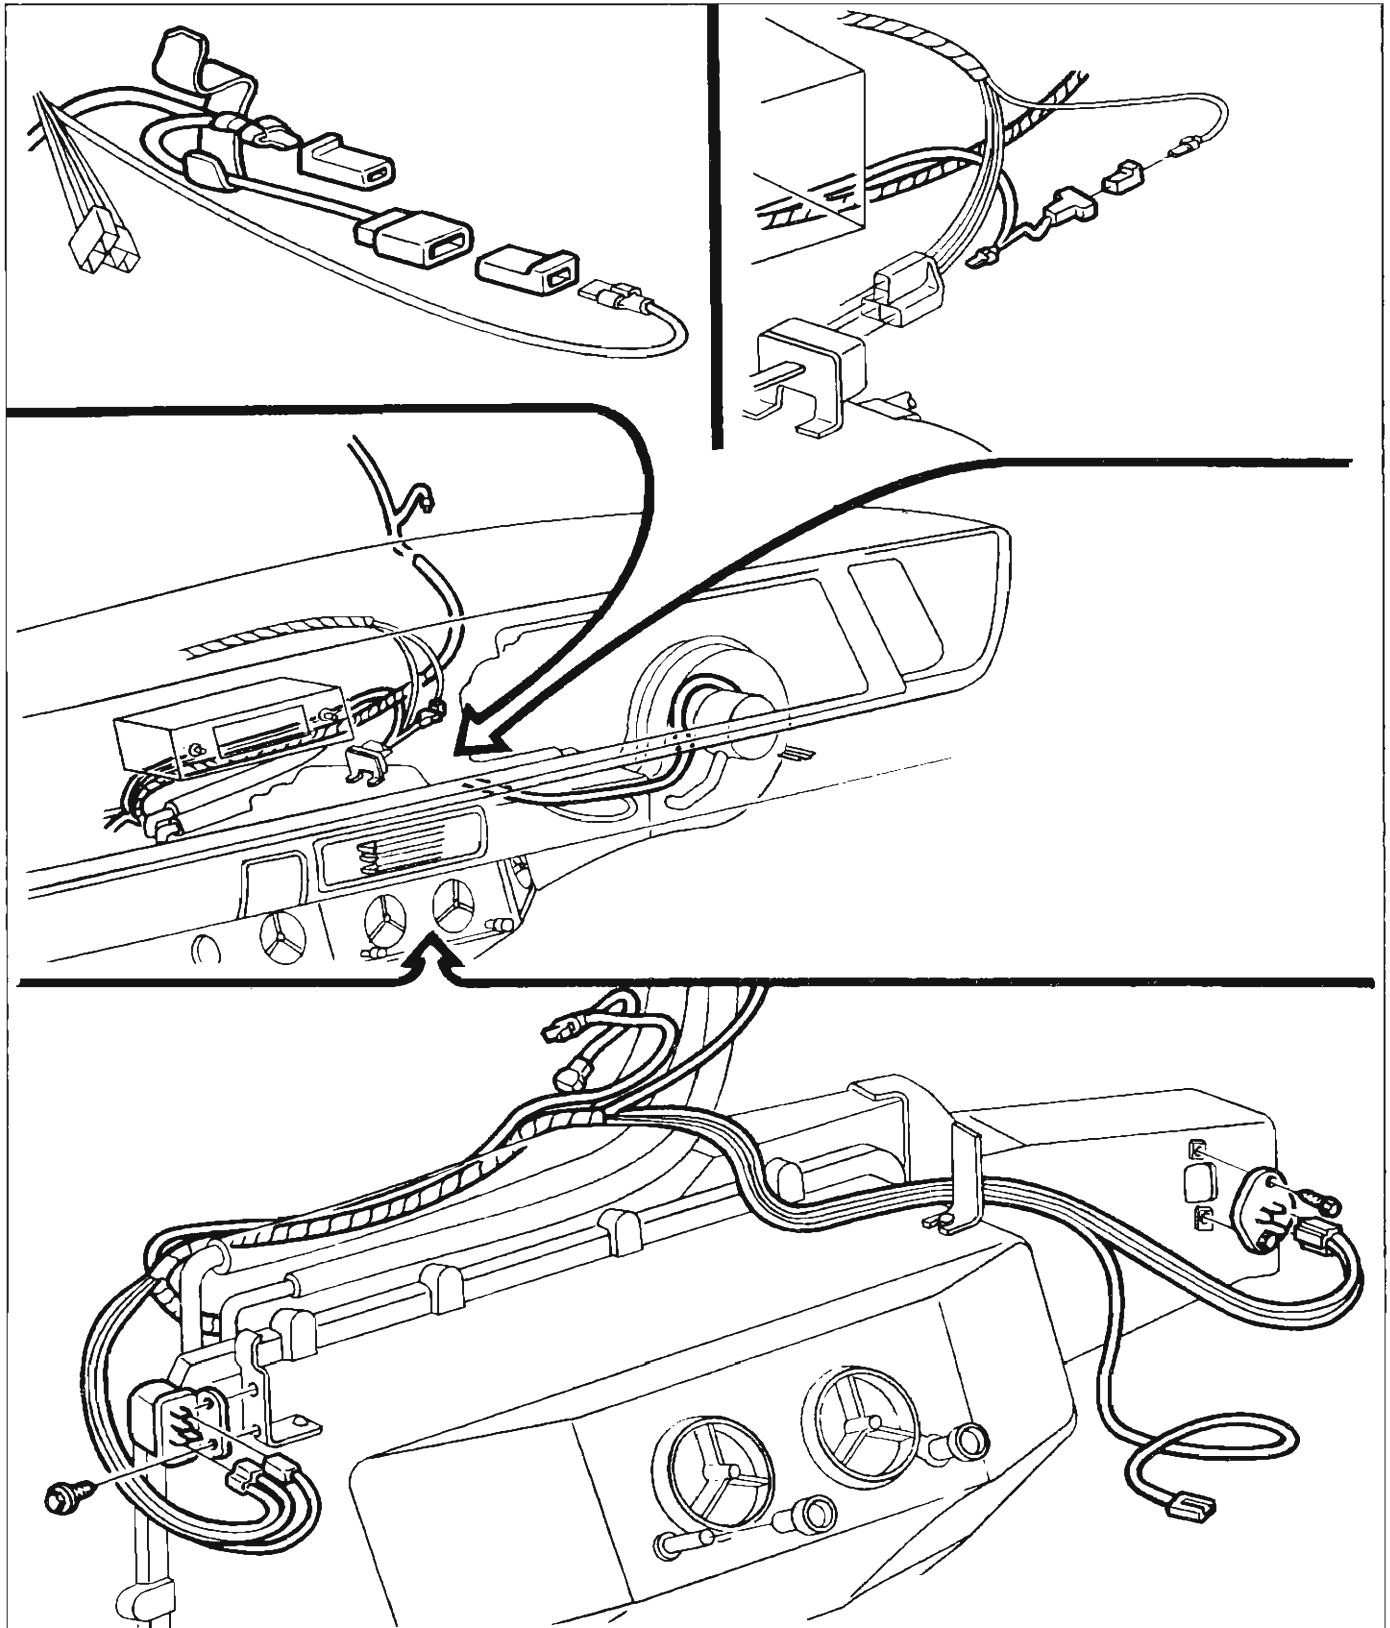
Underdash Wiring—Custom System—Chevrolet
